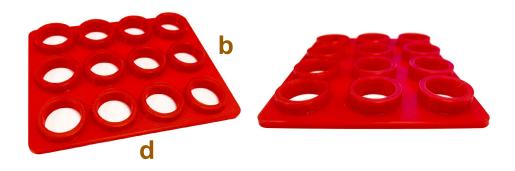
The figure shows the 3D printed plate with different hole configurations. It was used to test hole fitting for concepts c20. The plate dimension is $82 \text{ mm} \times 102 \text{ mm}$ (b x d).
